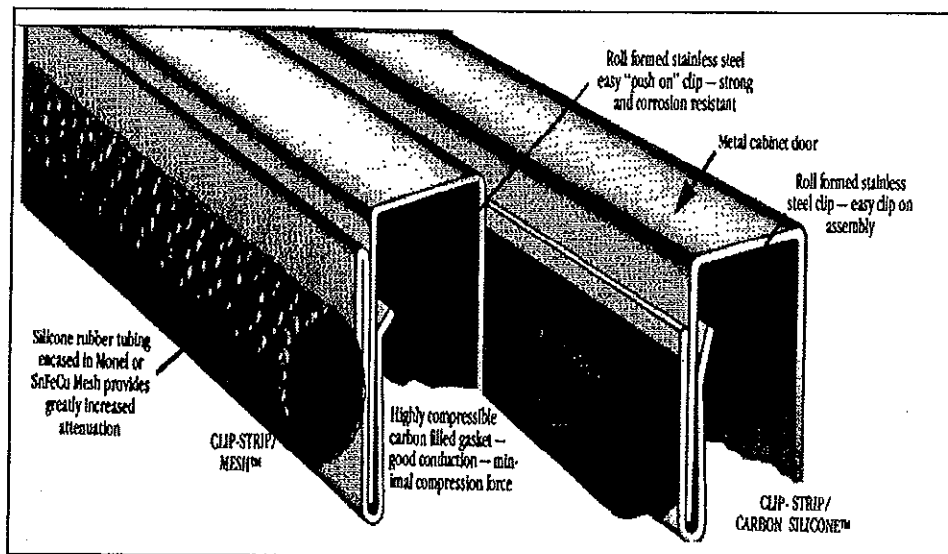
Mesh Covered and Carbon Filled Gaskets (courtesy of Pawling Corp.)
